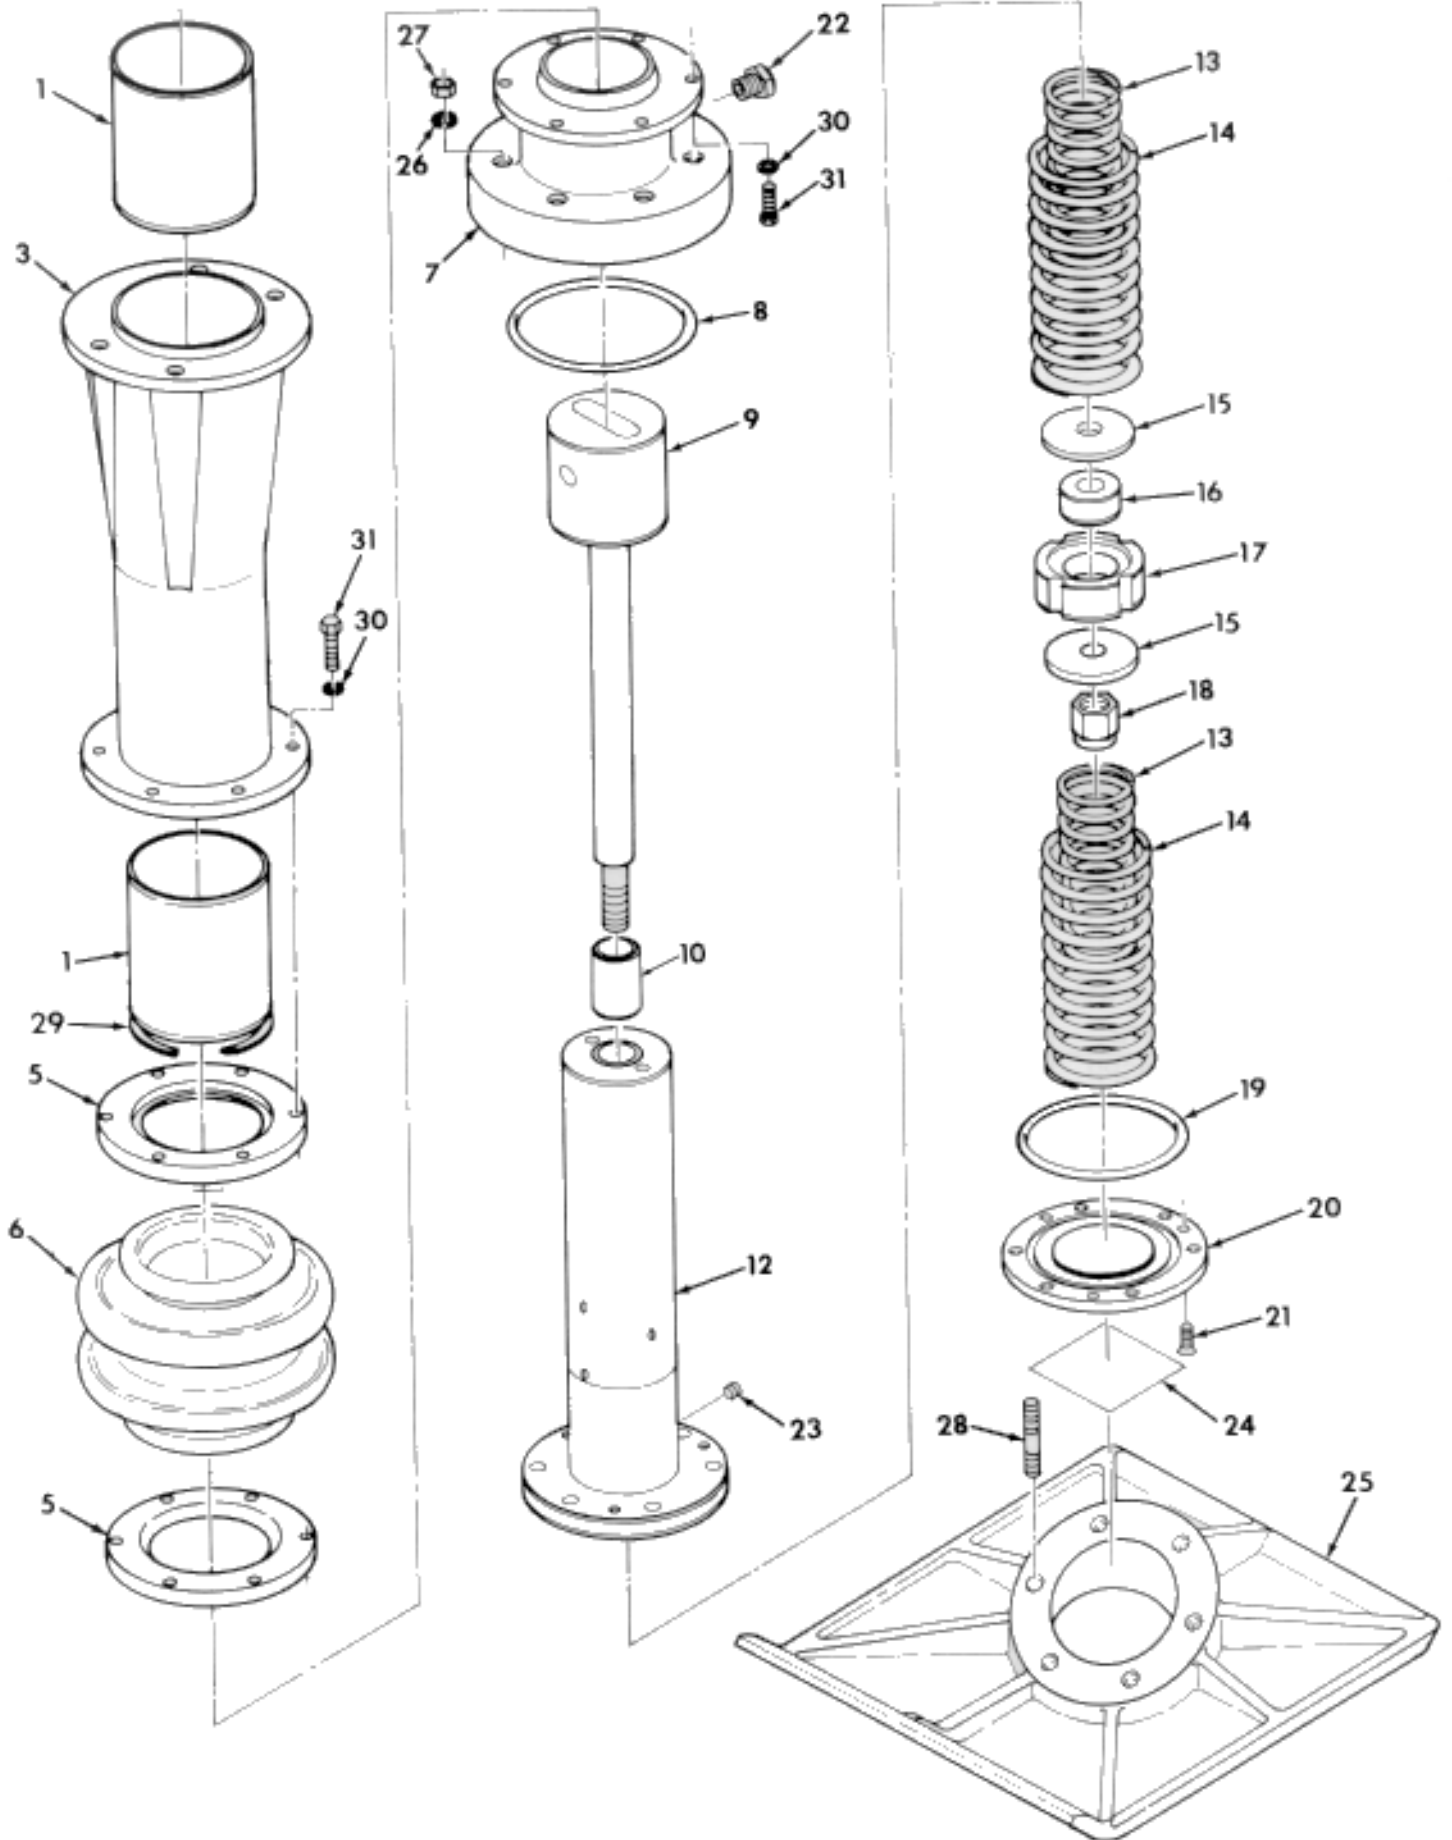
270, 450 & 451 LOWER SYSTEM
